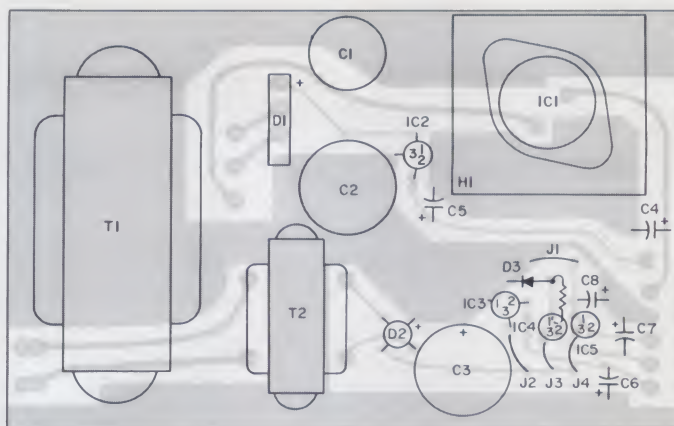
Component placement on the component side of the PC board for the supply using three-terminal regulators.
